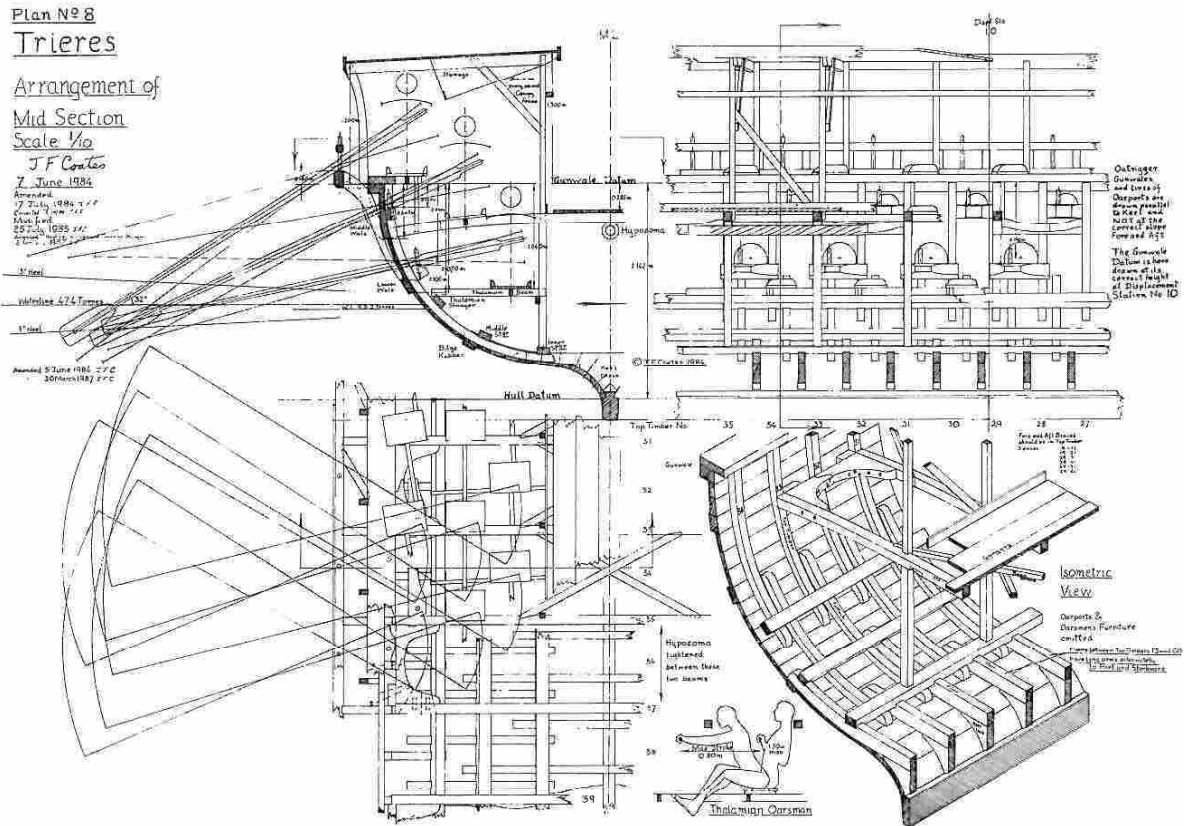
Existing arrangement of mid-section in Olympias (Plan 8) (Drawing: John Coates).
